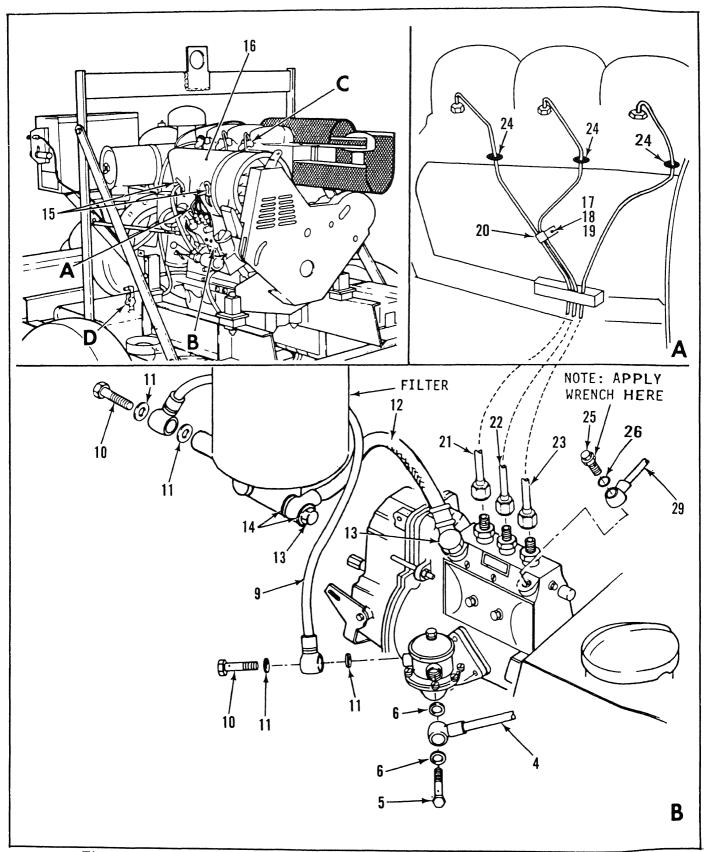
Fuel Lines, Hoses and Fittings, Removal/Installation (Sheet 1 of 2).
